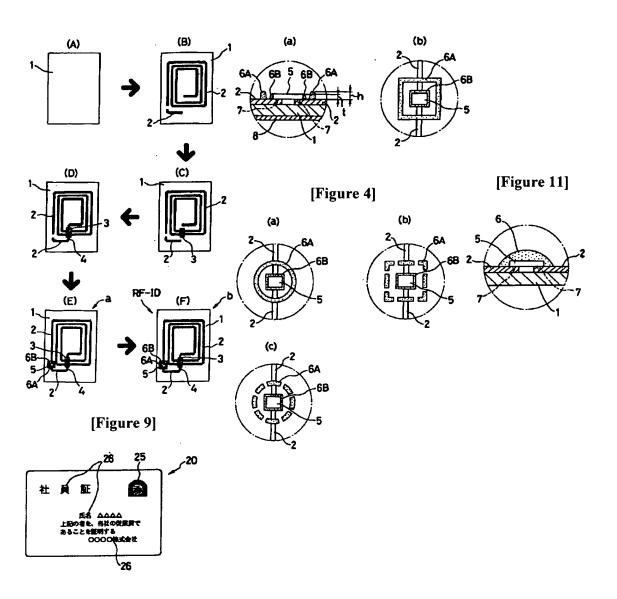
An explanation drawing explaining a cross section of a non-contact type IC media that is produced in Figure 10.
